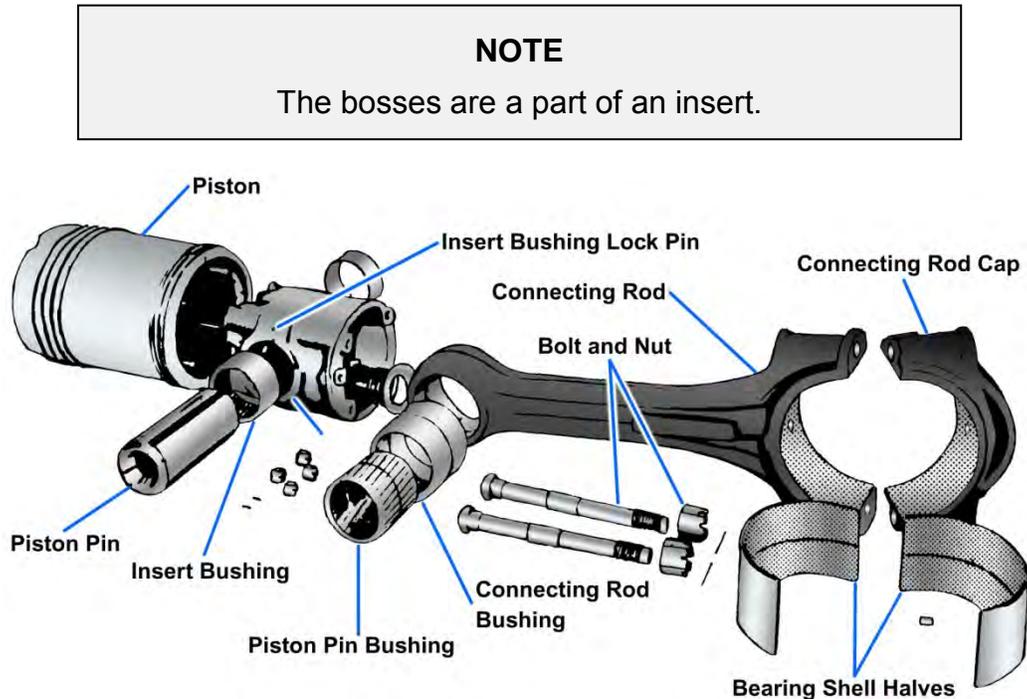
Piston and connecting rod (Fairbanks-Morse).
